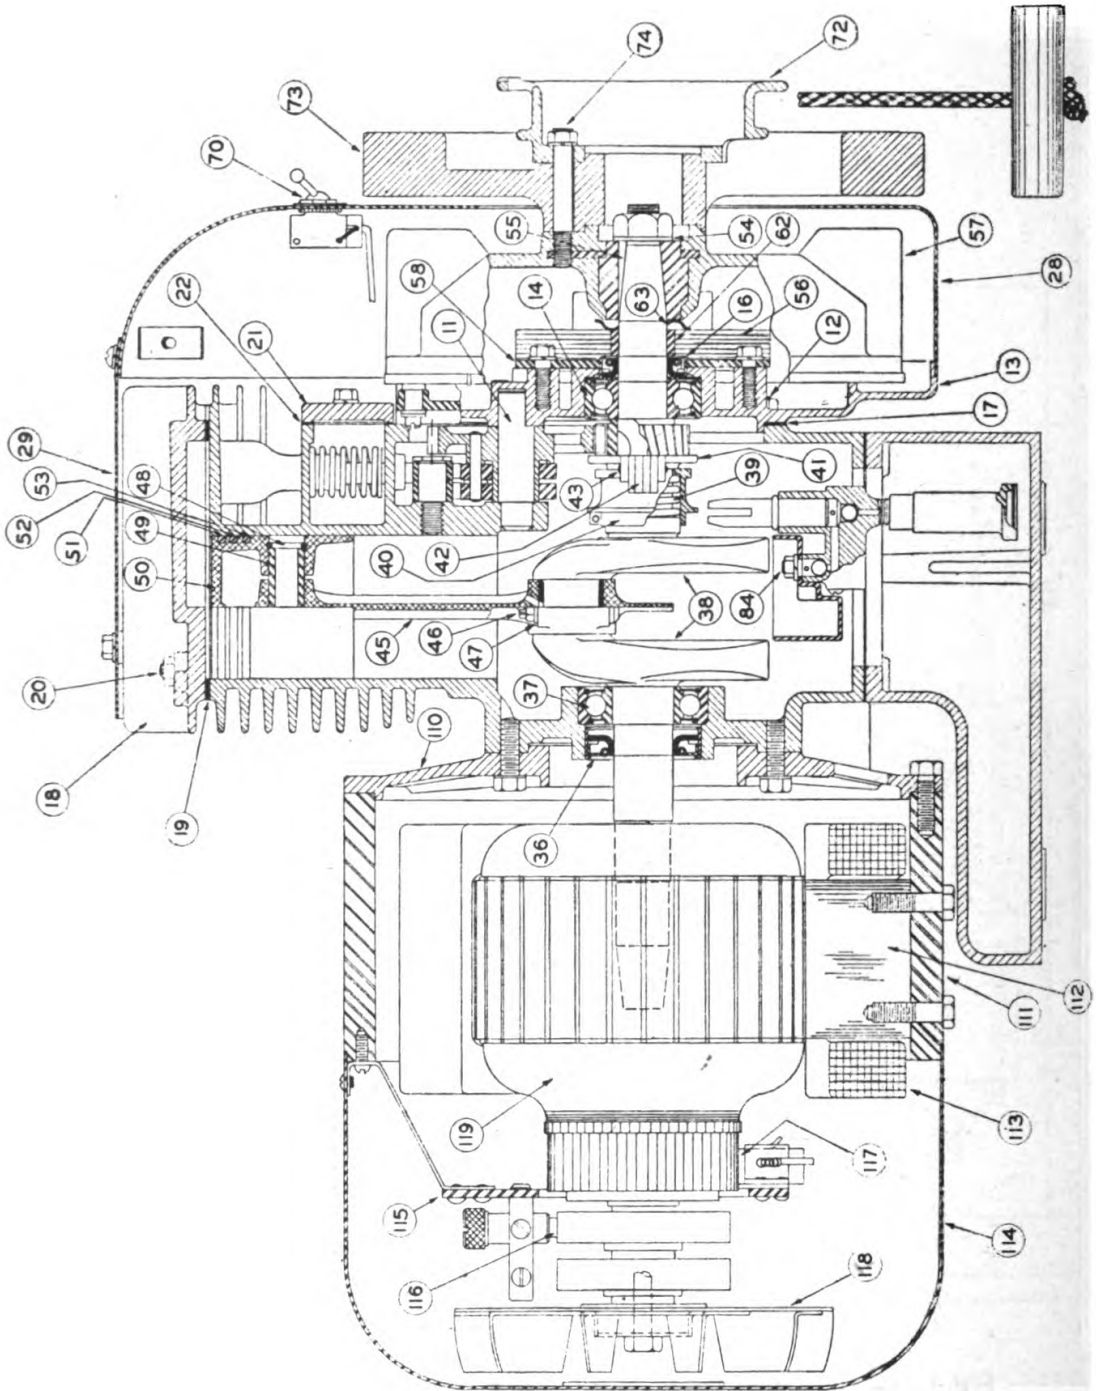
Cross-sectional Drawing, Power Unit PE-82-E
